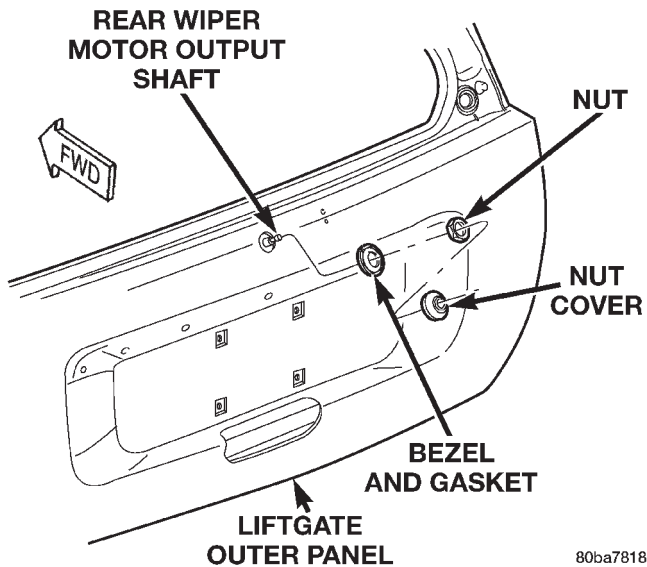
Rear Wiper Motor Output Shaft Remove/Install
